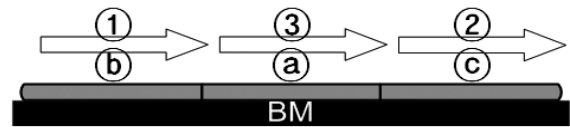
Schematic of symmetric welding sequence (bead on plate)
